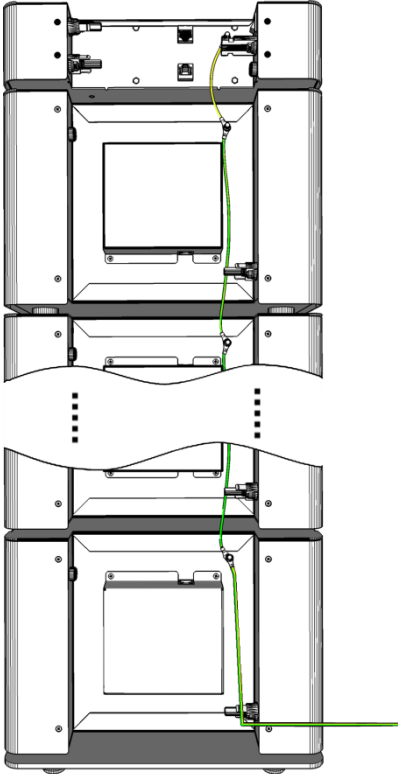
Connection parts and assembly for protective earth connection of inverter housing
